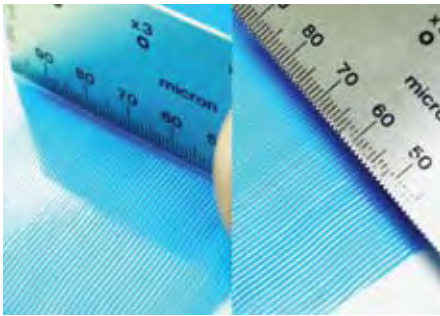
"Comb" style wet ink film thickness gauge (Gardco).
